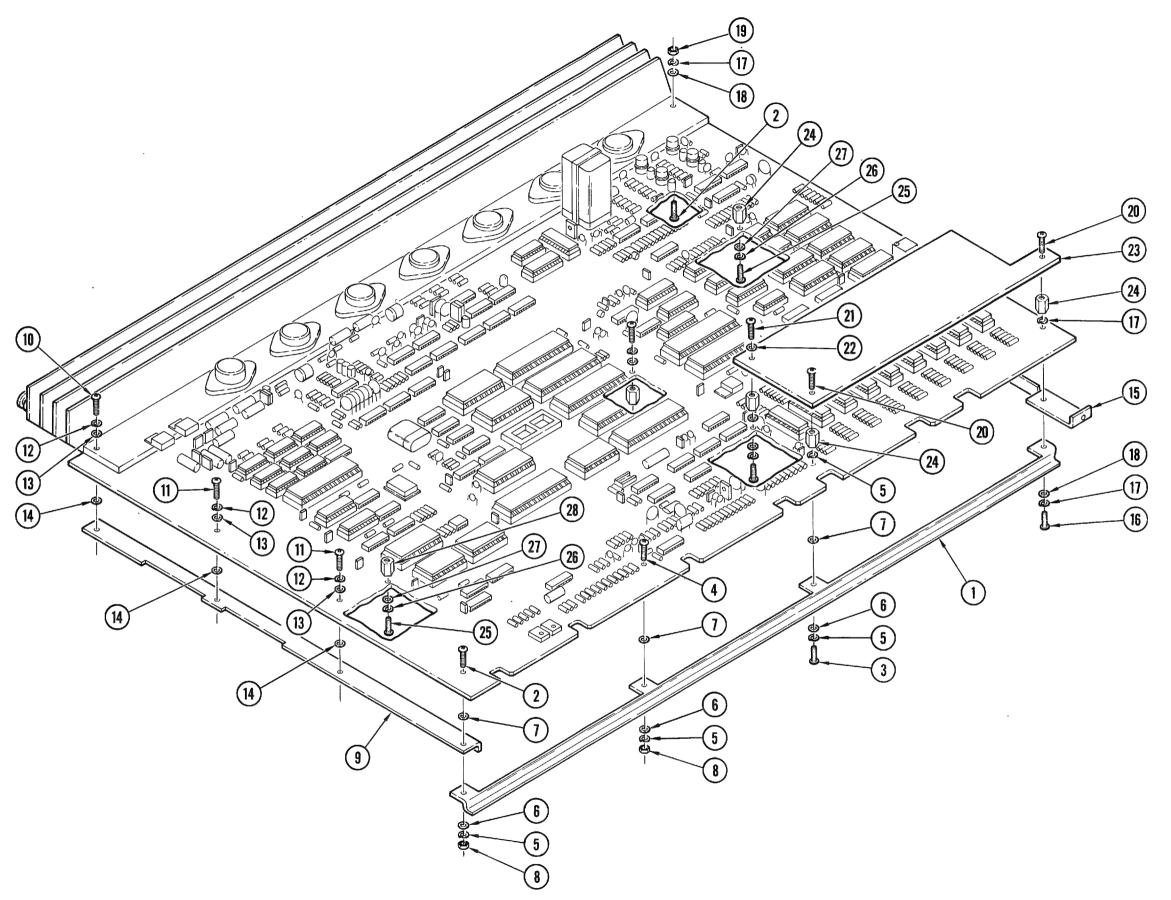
Drive Formatter Printed Wiring Board Assembly (Exploded View)
